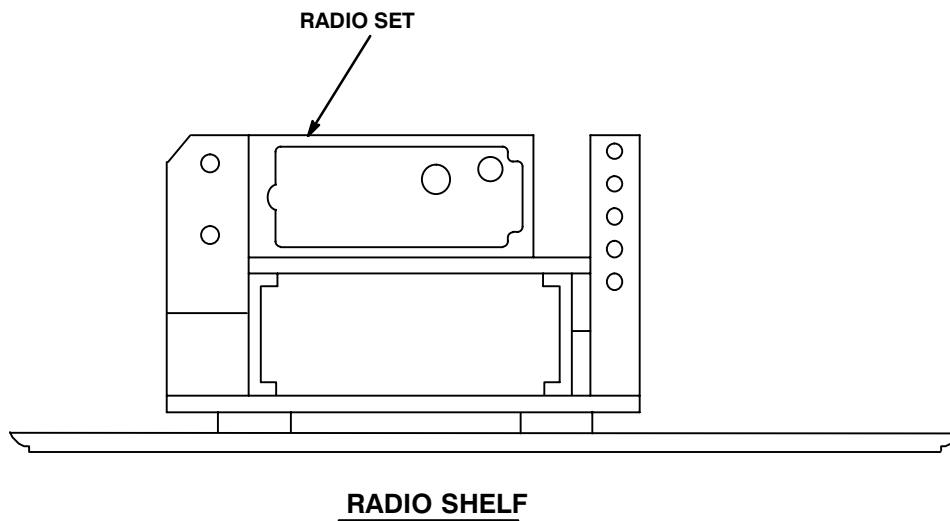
(2). MK and Radio Installation: Radio Equipment Locations
